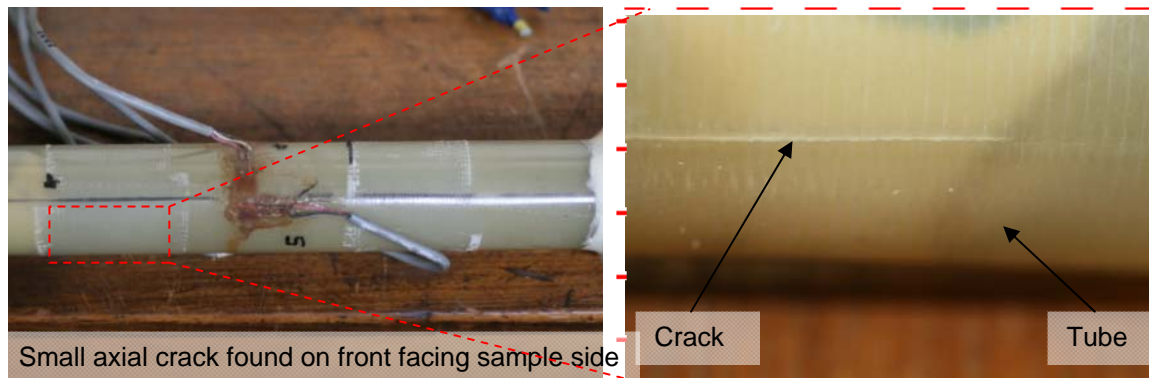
Post-test images of the AF tube (peak shock pressure of 350 bar) featuring axial cracking near one end (left) and a zoomed in view of the crack formed during the blast (right).
